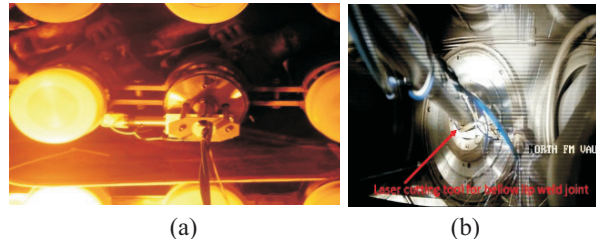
In-situ laser cutting of (a) end fitting, and, (b) bellow joint of L-8 coolant channel of TAPS-4 reactor.
